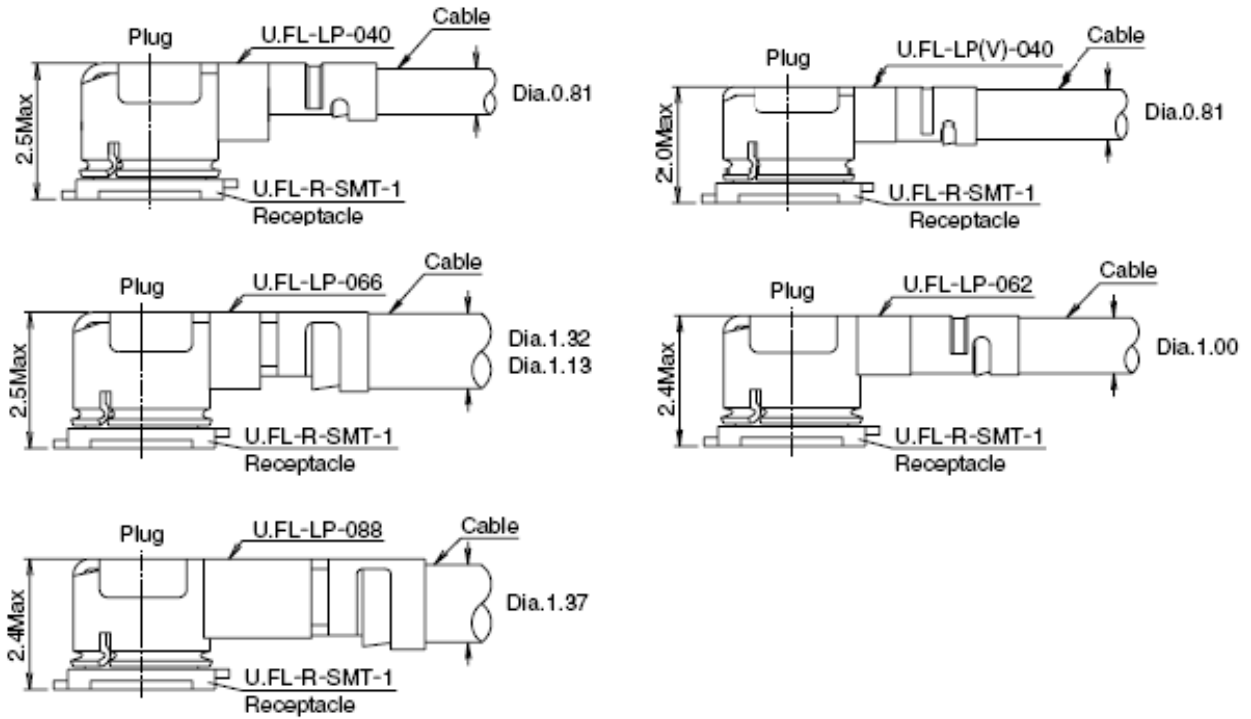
Dimensions of the Receptacle (Unit: mm)
